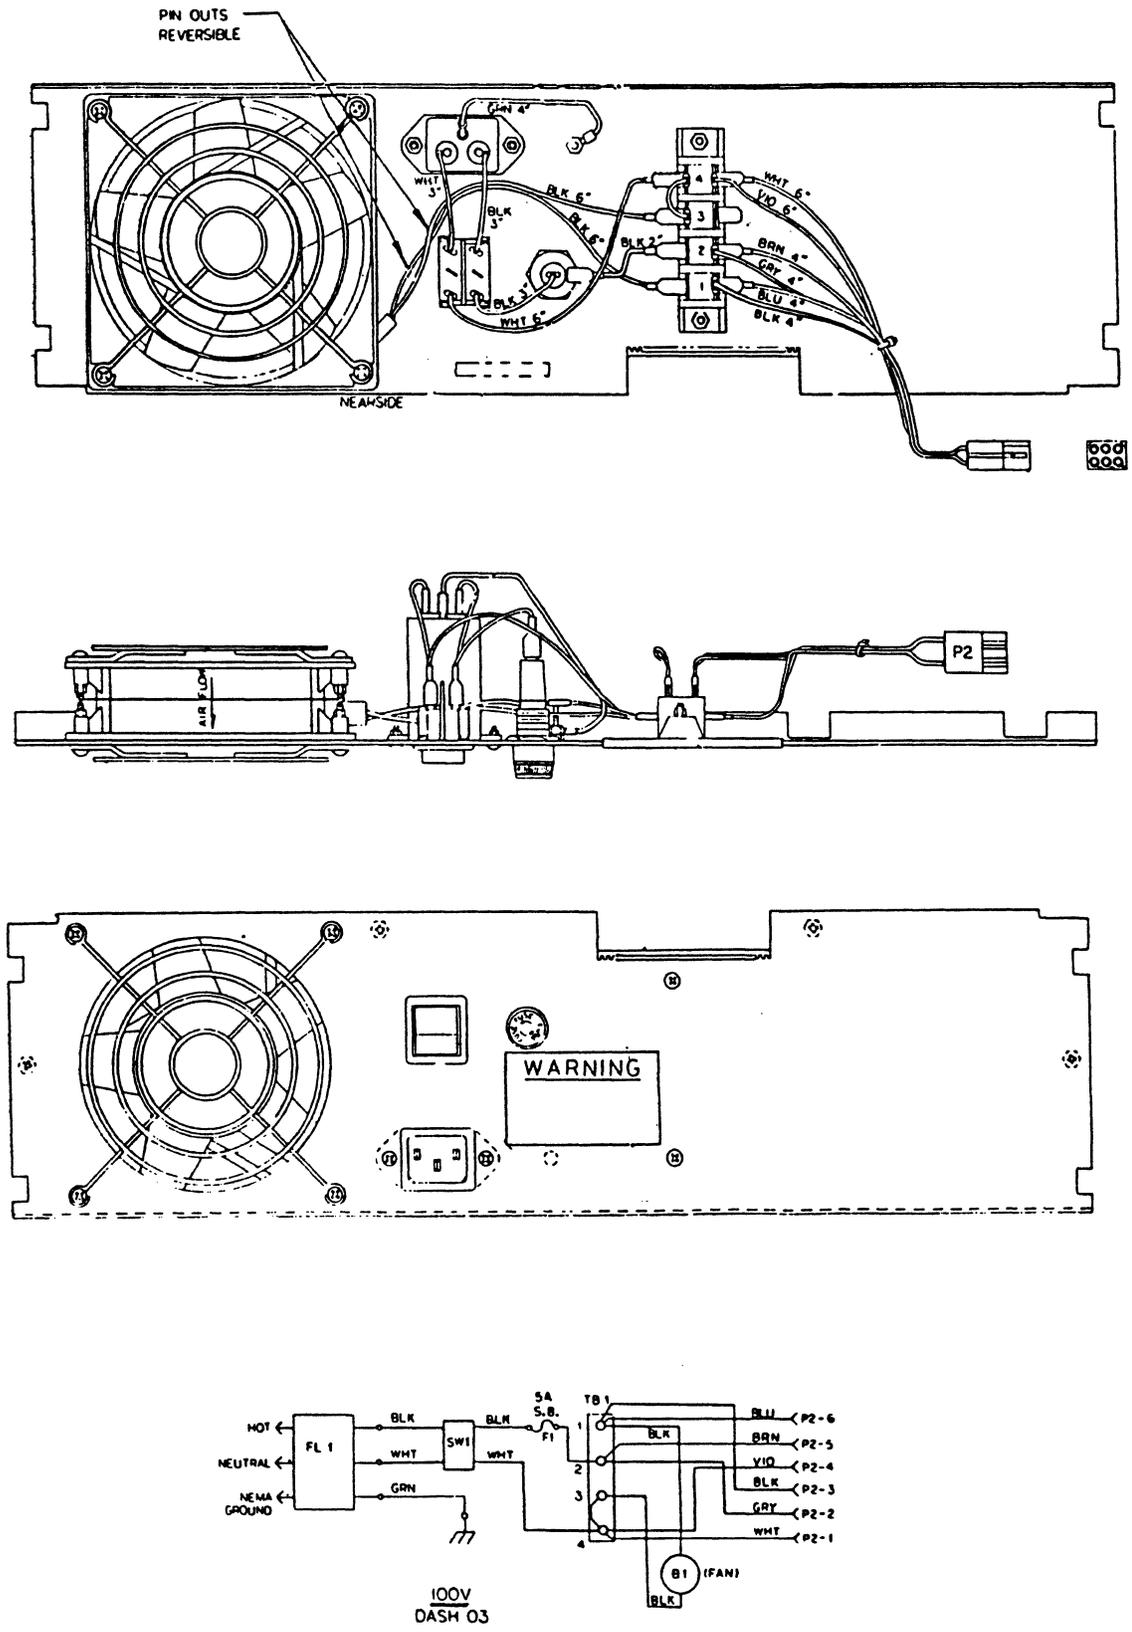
Rear Panel Assembly (Sheet 3 of 4)
